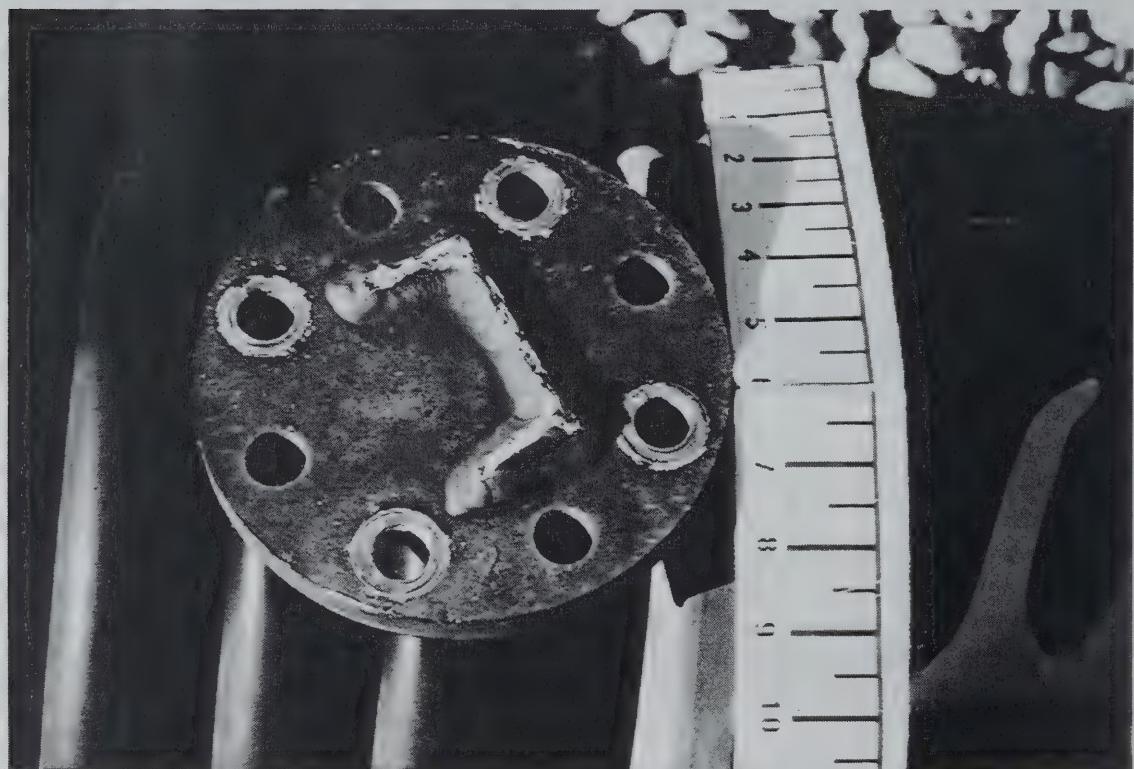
A weld to a plate bolted to the top of a post insulator failed
